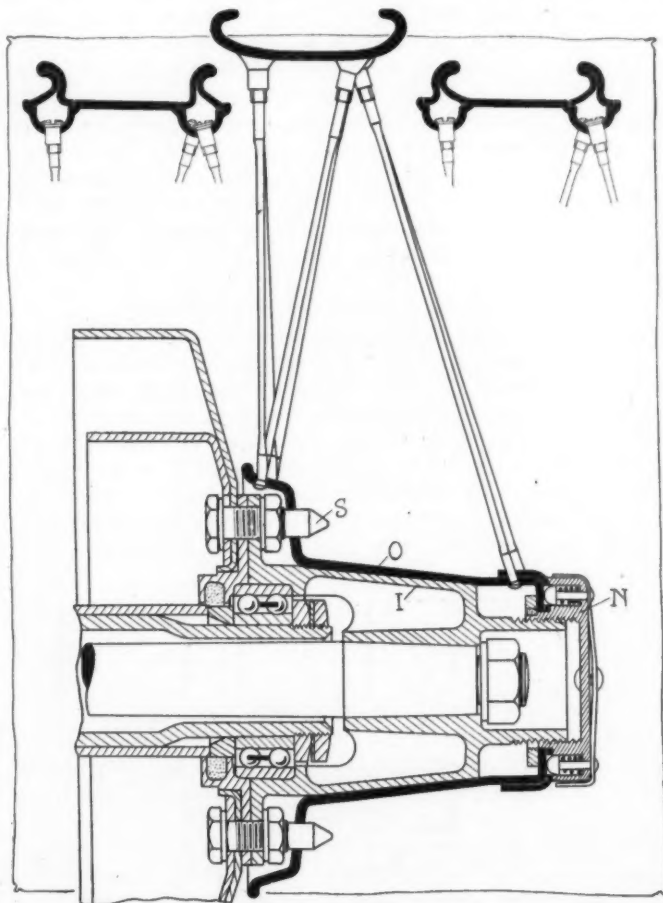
Section through McCue wheel, showing conical hub and method of driving by spigots
